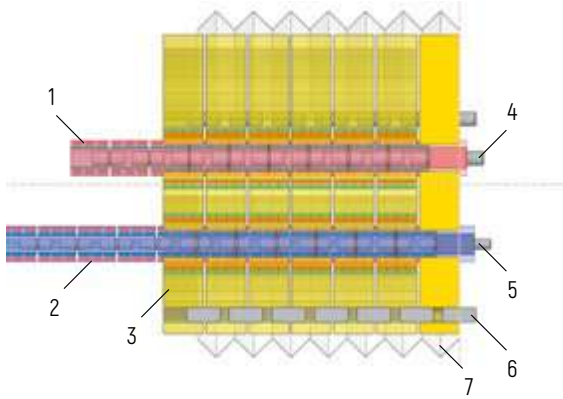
Longitudinal section of the GPV: 1 – segment of the rotor 1; 2 – segment of the rotor 2; 3 – segment of the stator; 4 – guide components of the rotor 1; 5 – guide components of the rotor 2; 6 – guide components of the stator; 7 – GPV body
